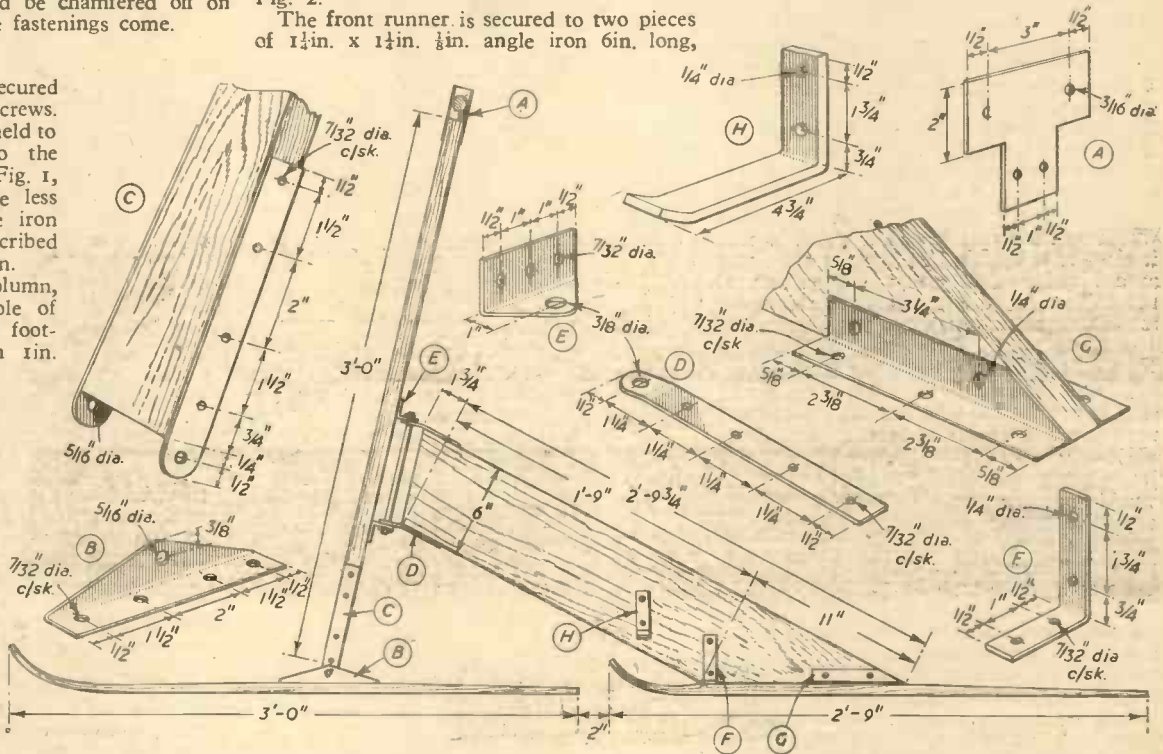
A dimensioned side elevation of the second design, and constructional details and dimensions of all the parts.
